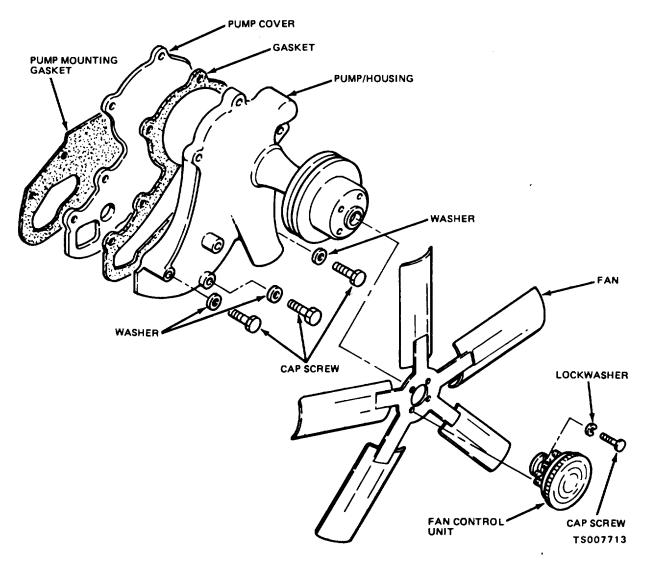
Water Pump and Fan Blade, Removal and Installation
